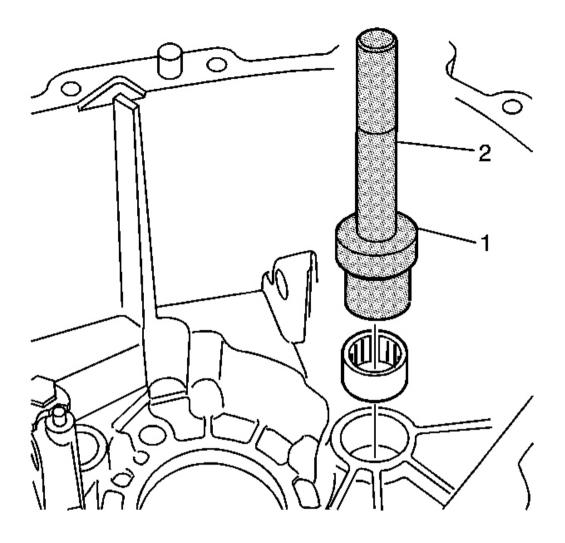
Intermediate Shaft Needle Bearing, J 44383 & J 8092 Courtesy of GENERAL MOTORS CORP.
